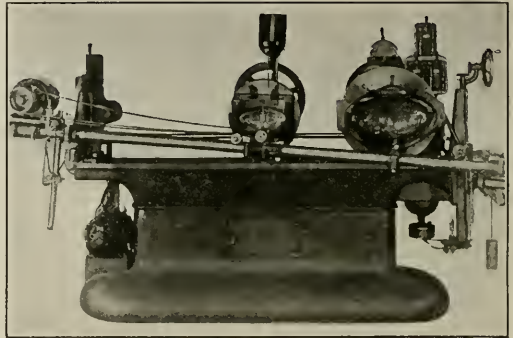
LARGE-SIZE MOTOR-DRIVEN REDUCING MACHINE CUTTING DIE FOR AN ORNAMENTAL BOWL
